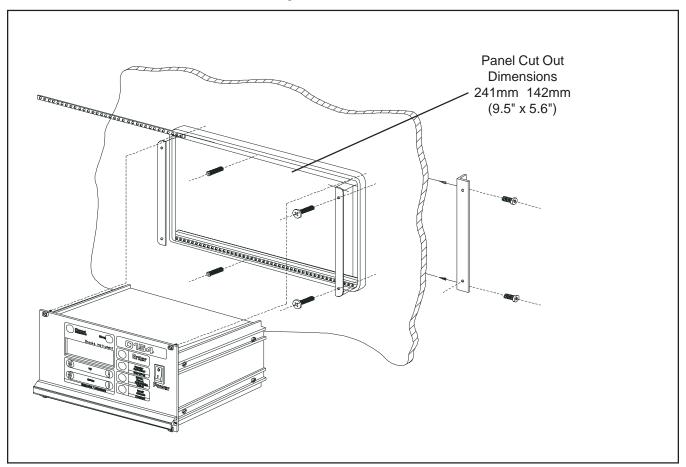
Mounting of Panel Mount Unit with Dimensions for the Panel Cut-Out
